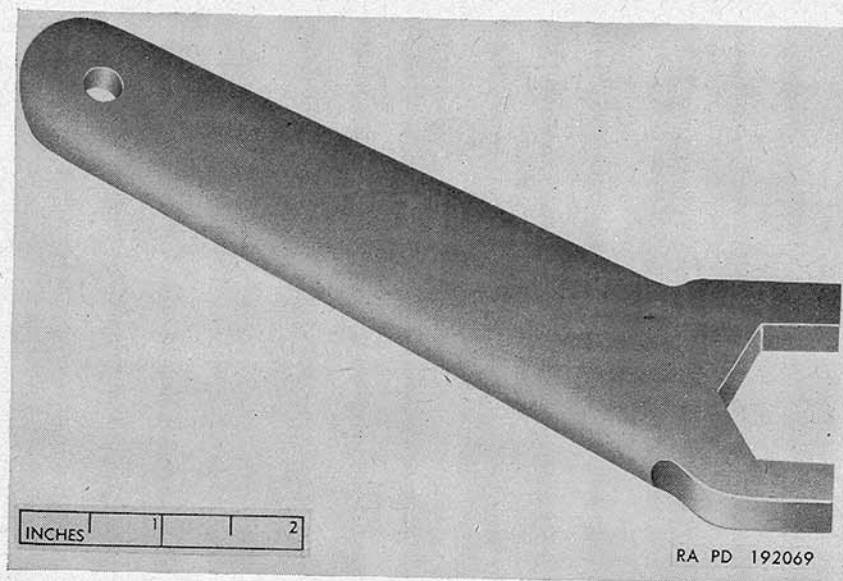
Charger tube coupling fixed open-end wrench—7188574.
